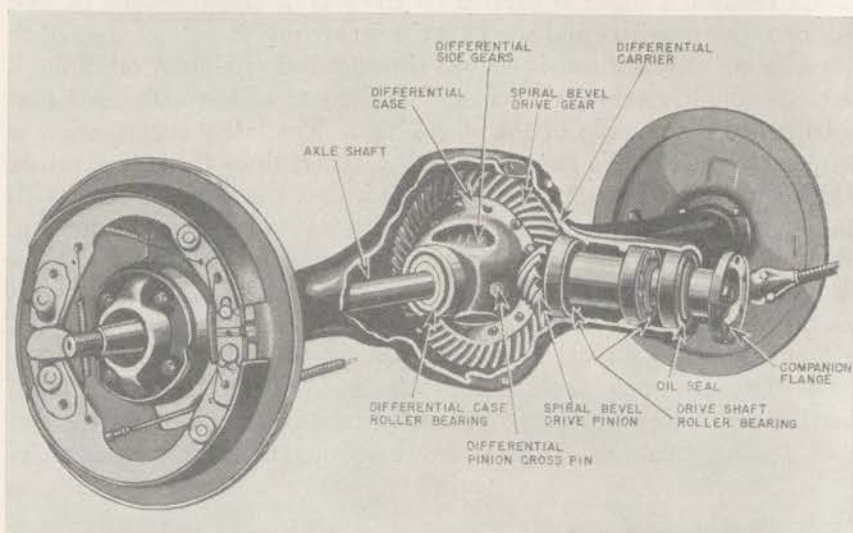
Semifloating rear axle with a spiral bevel gear.
